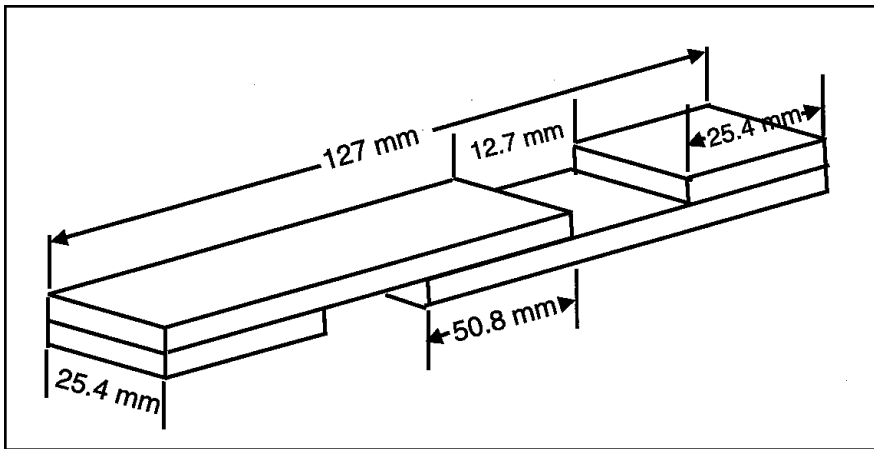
Overlap shear specimen. All dimensions are in mm.
